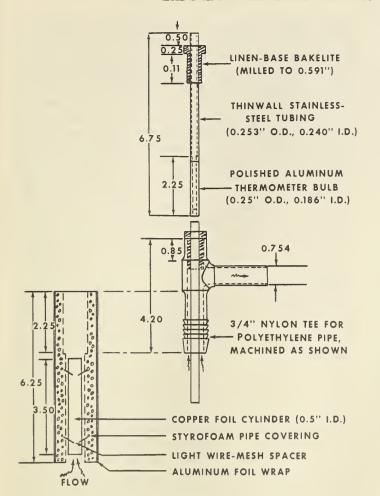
Scale drawing of thermocouple housing. All measurements in inches.
